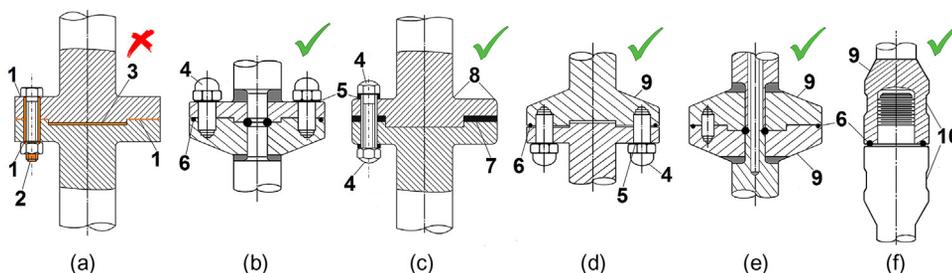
(a) Bolted agitator couplings with flat hexagon head screws without elastomer gasket under the bolt head and the nut give rise to metal-to-metal crevices (1) that may allow the ingress of food product and bacteria. Moreover, debris may lodge in and around the bolt thread (2). The absence of a circumferential O-ring or flat gasket gives rise to another metal-to-metal crevice, and product and microorganisms may be retained in the cavity (3). (b, c) Agitator couplings made by means of domed hexagon bolt heads and nuts (4) provided with an elastomer gasket (5) under the bolt head and the nut allow for a crevice-free joint without metal-to-metal contact. Due to the presence of a circumferential O-ring (6) or flat gasket (7), no product or microorganisms can enter inside the agitator coupling. Corners are radiused (8). However, there is still a horizontal flat surface at the upper side of the agitator coupling where debris may lodge. (d, e) Aseptic applications require for fastening hardware at the bottom side of the agitator coupling, and the upper parts of the coupling should be sloped to a minimum of 15–45° (9) to prevent debris from collecting at these places and to allow for maximum drainability. (f) The most optimal agitator coupling in an aseptic environment is a threaded shaft connection with a O-rings or flat gasket (preference for the first mentioned) (6) to seal the mating surfaces to avoid exposure of the interior thread. The corners of the spanner flats on the end cap have been radiused (10) (CFCRA, 1997; Hauser et al., 2004b; ASME, 2009).
